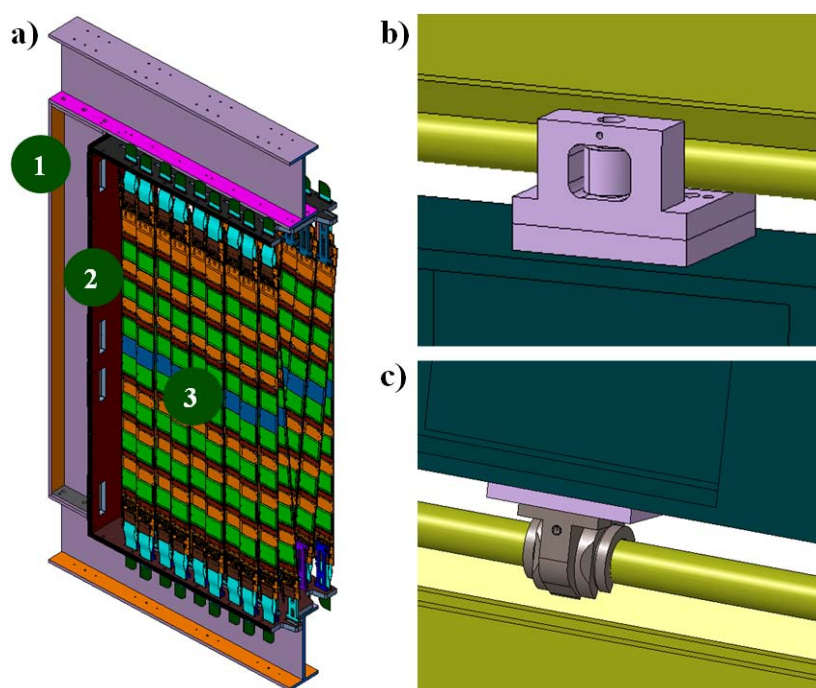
a) UT C-Frame and box with staves; b) Top C-Frame rolling guidance; c) Bottom C-Frame supporting slider [26]
